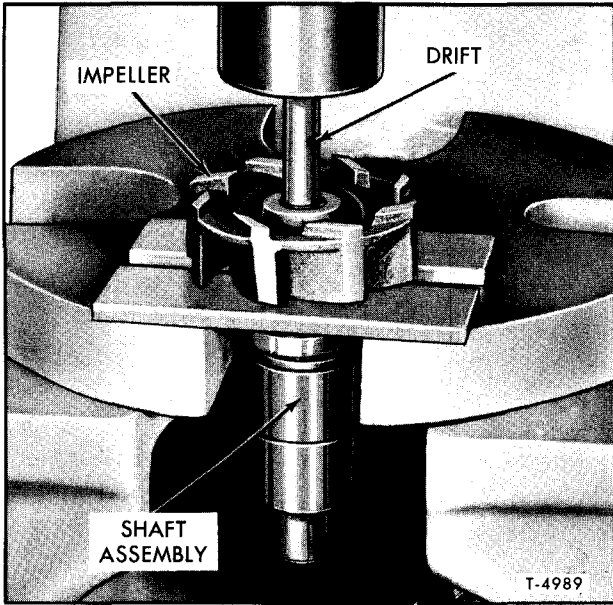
Removing Shaft from Impeller (6V-53 Engine)
